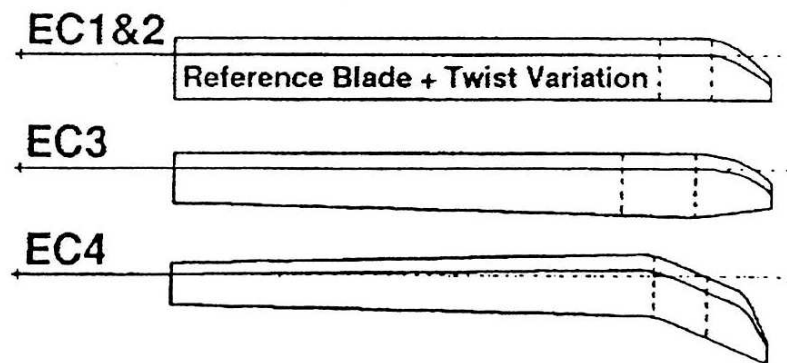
Optimised Rotor Blades, Bebesel (1999)²⁸
